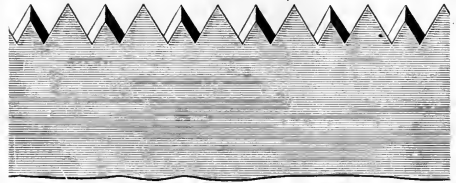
PEG TOOTH CROSS-CUT SAW.
